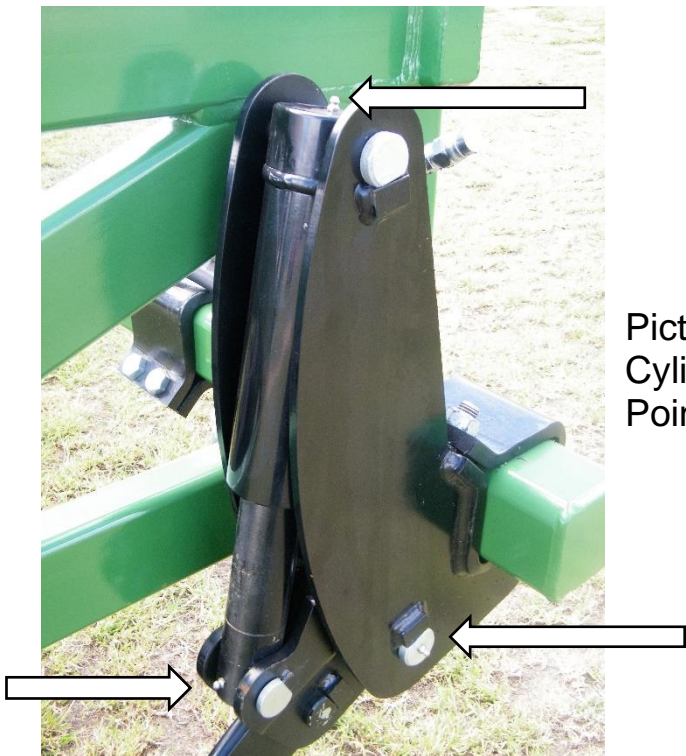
Wheel Arm & Wheel Lift Cylinder Grease Points
